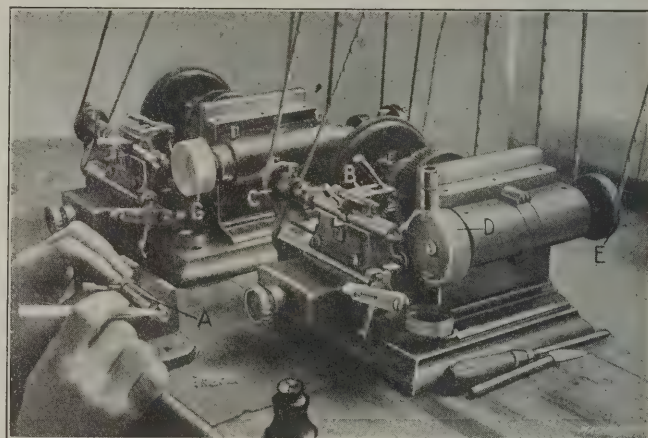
McGinty Staff Cone Grinding and Polishing Machine
